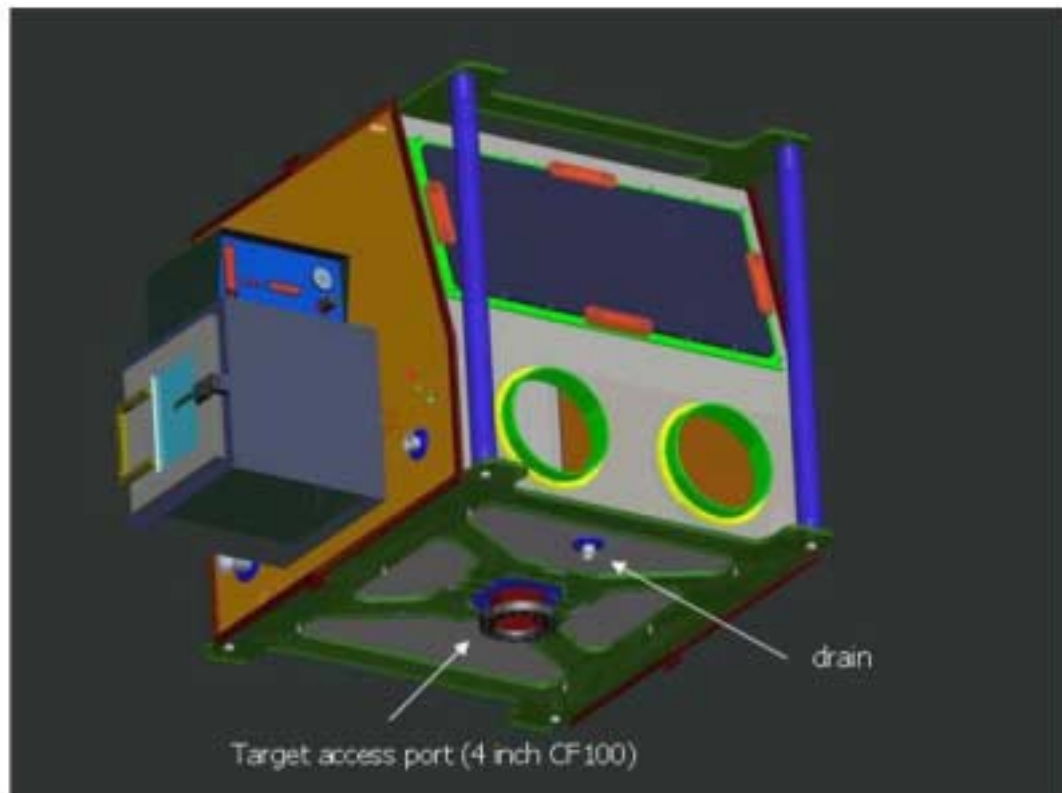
Bottom view of the GB showing the CF100 access flange and drain port.
